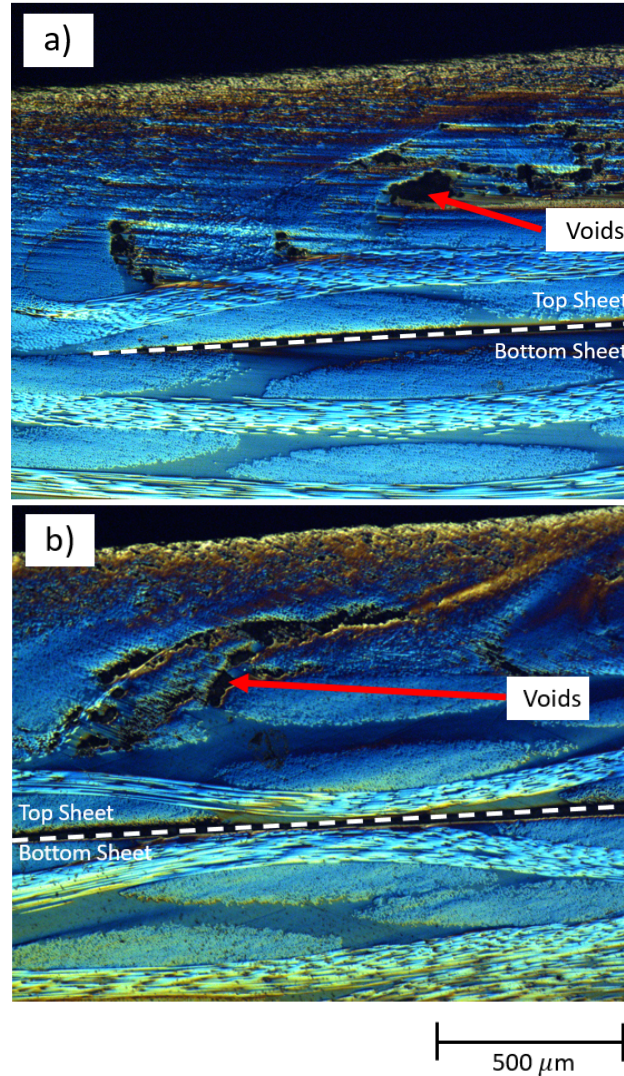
Voids visible in weld cross section specimens in conditions a) A1 and b) A3.
